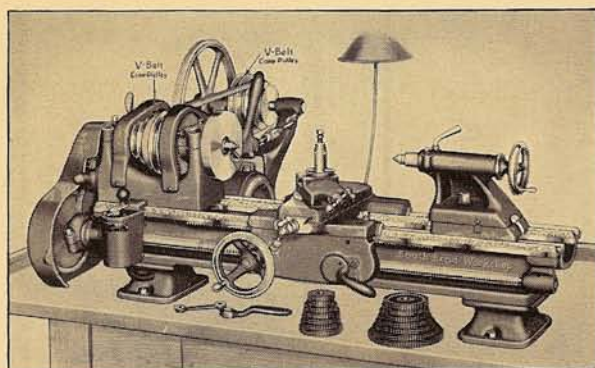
Horizontal Motor Drive Countershaft, Adjustable Type
